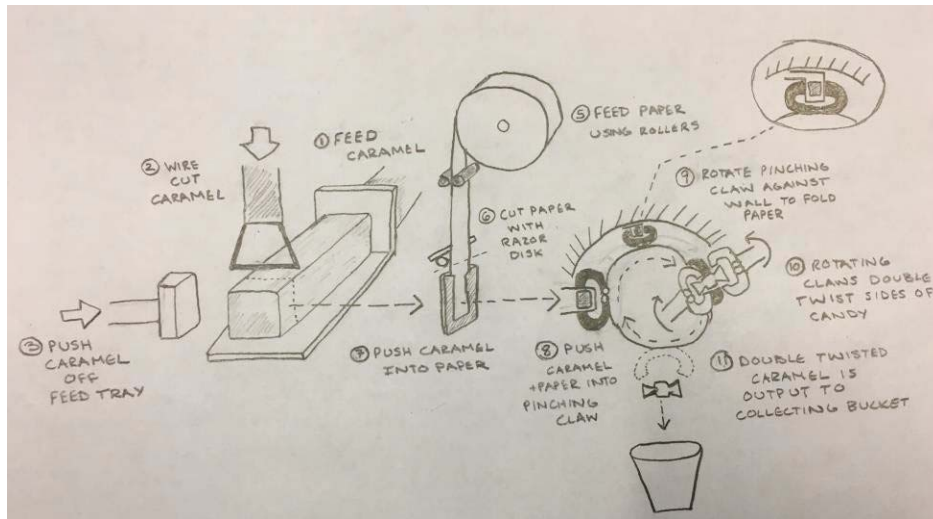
Full system layout C. The caramel is fed on a tray and cut by a wire cutter before being pushed into roller fed paper that is cut by a horizontal disc cutter. The caramel is placed into the paper and pushed into a pinching arm on a rotating disk that is rotated 180 degrees, which folds the paper around the caramel, and eventually wrapped by two rotating claws before exiting using gravity as the pinching arms open.
